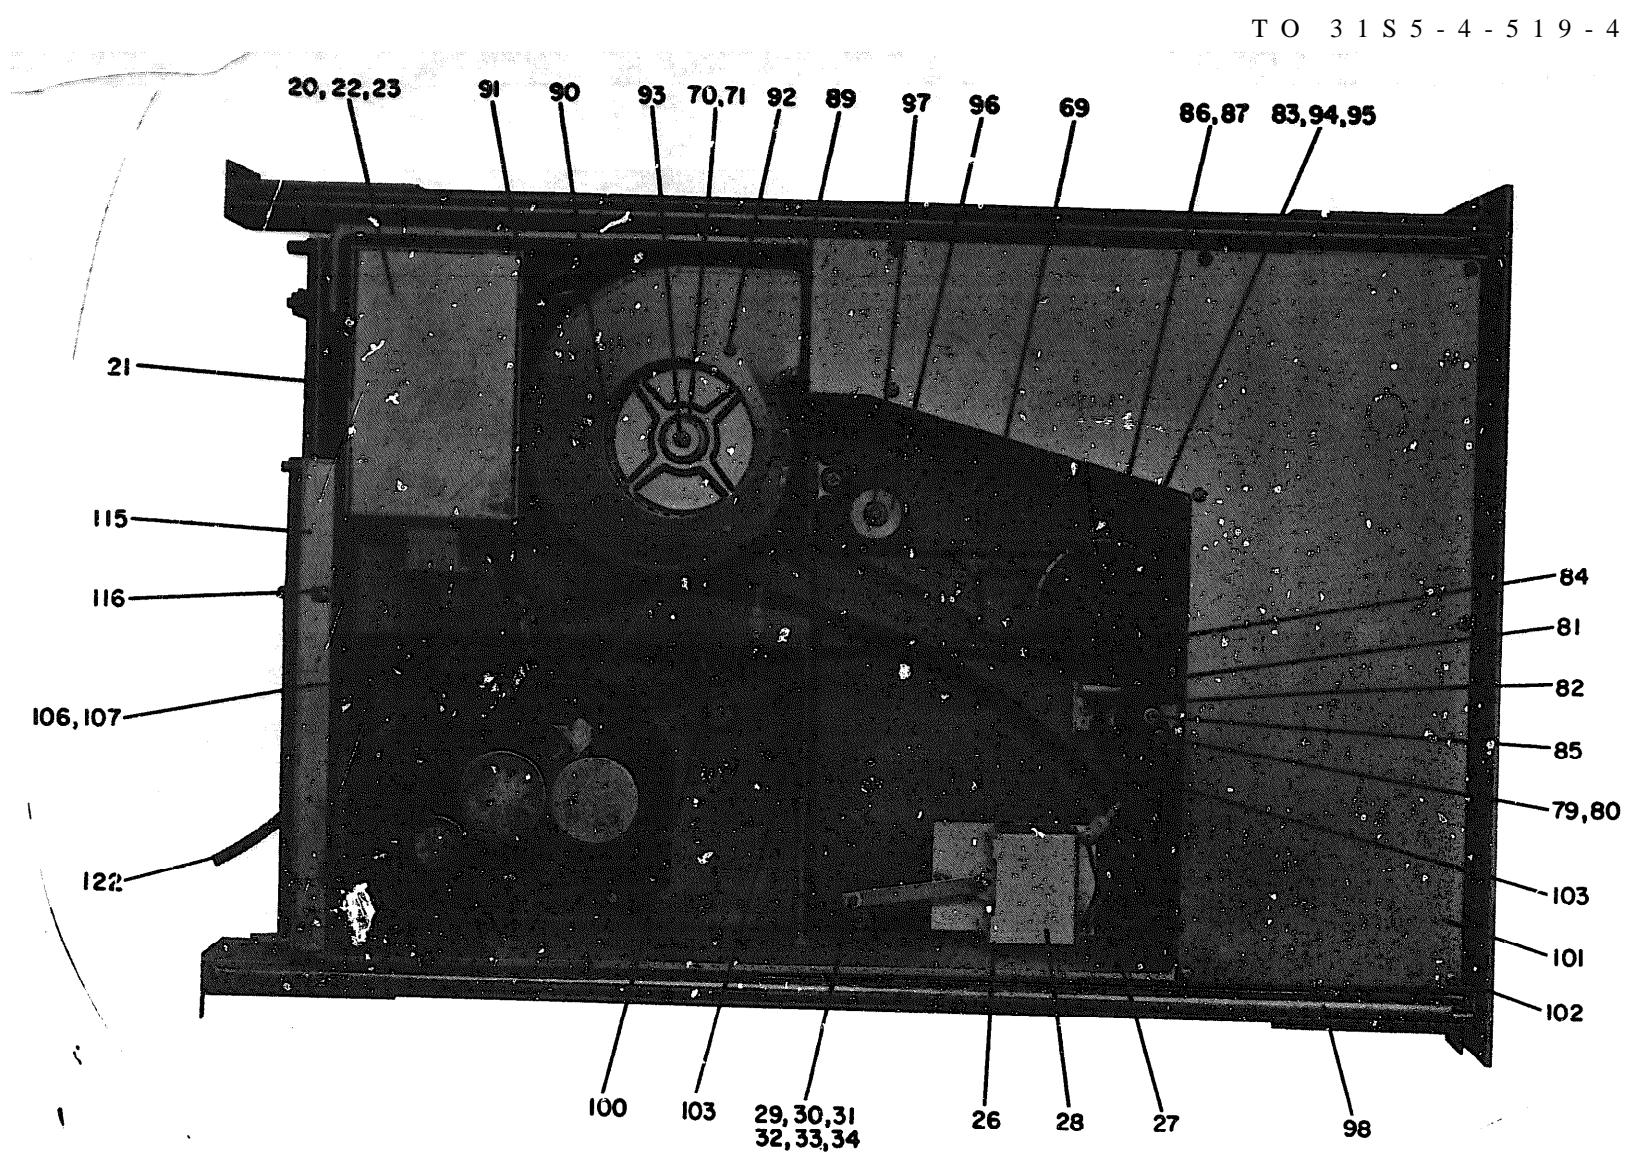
Disc Drive Assembly (Sheet 4 of 5).
